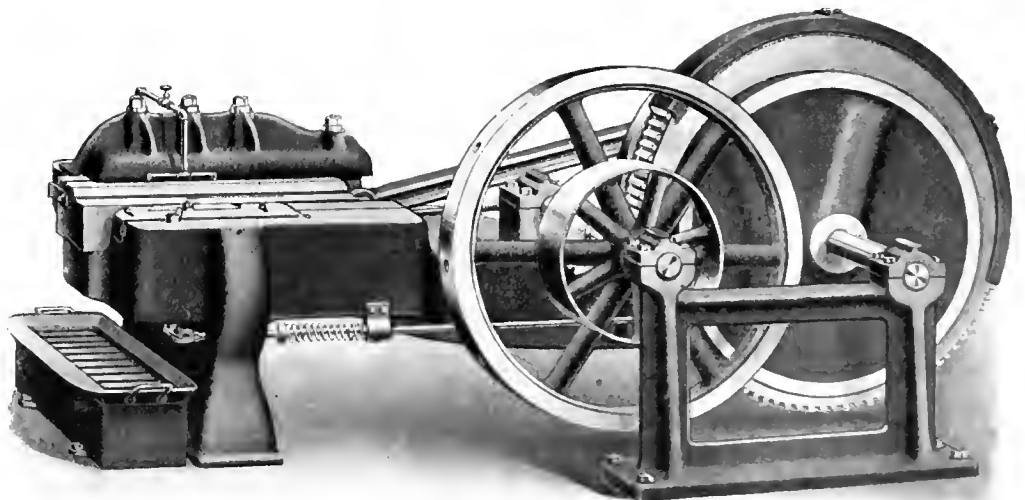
Cutting-off Attachment mounted on Large Size Buckeye Die-stock.
